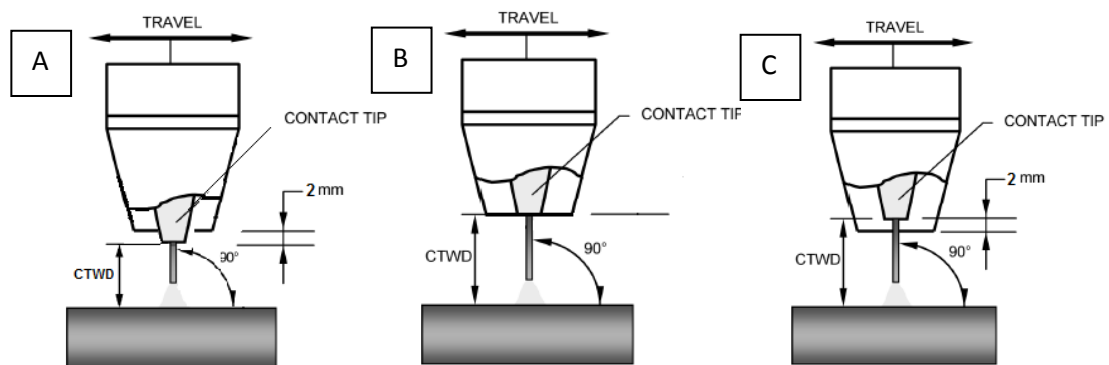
A diagram showing the contact tip position relative to the shielding nozzle used during welding
